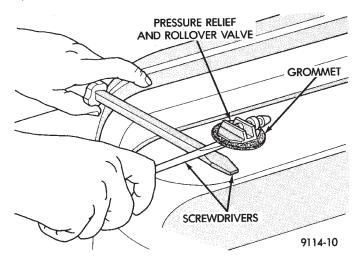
Removing Pressure Relief/Rollover Valve—Front Wheel Drive.
